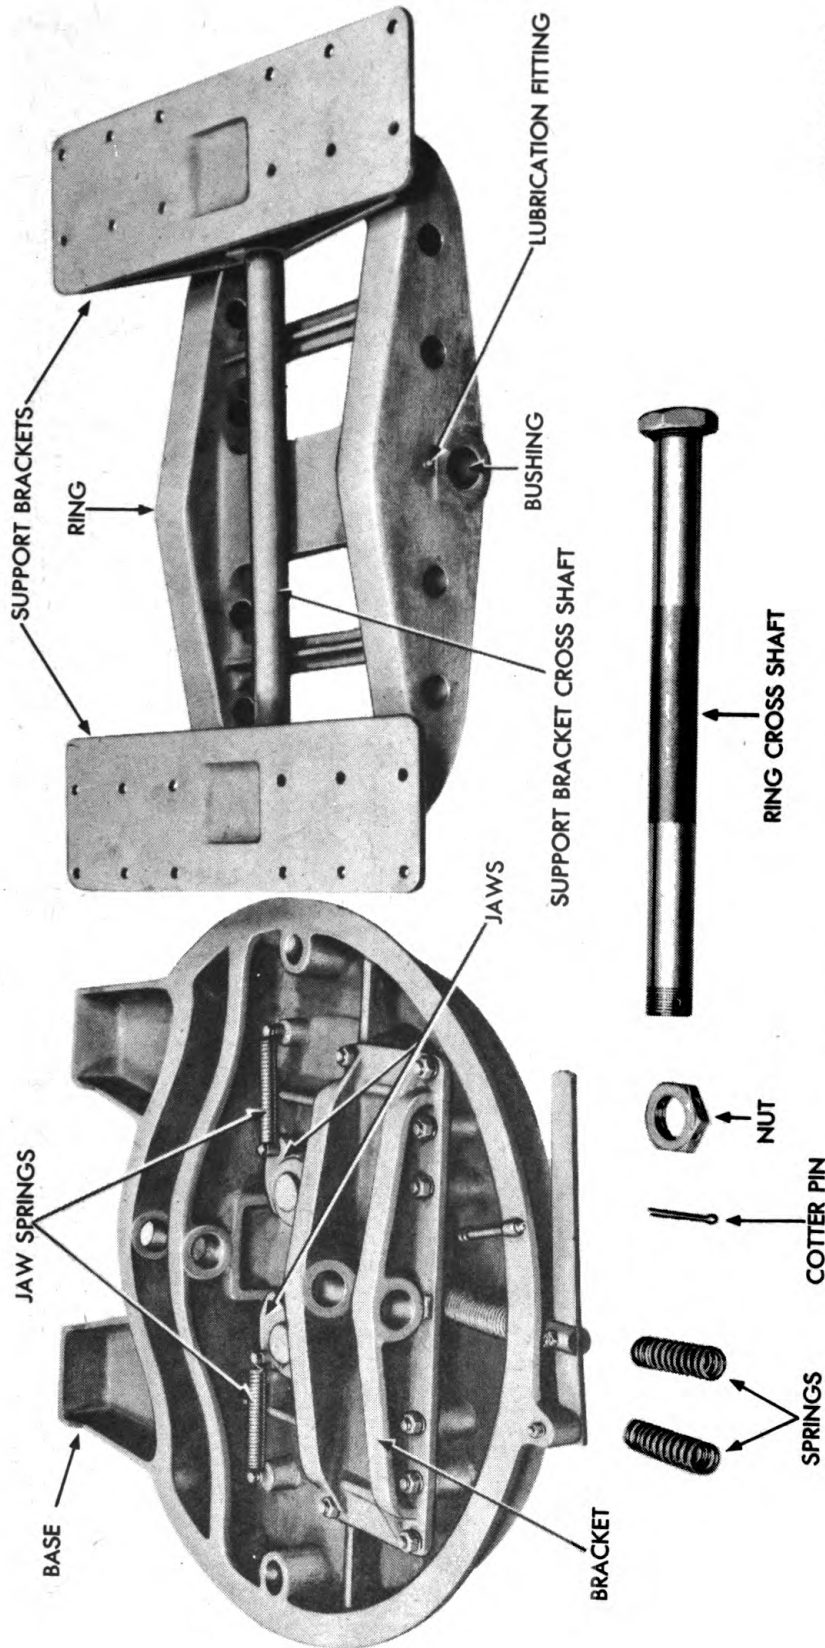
Support Brackets and Ring Assembly Removed from Fifth Wheel
